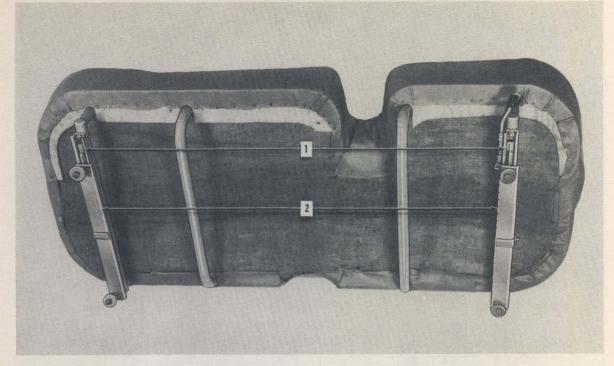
Seat Cushion and Back Assembly with Seat Adjuster Slides Attached.
